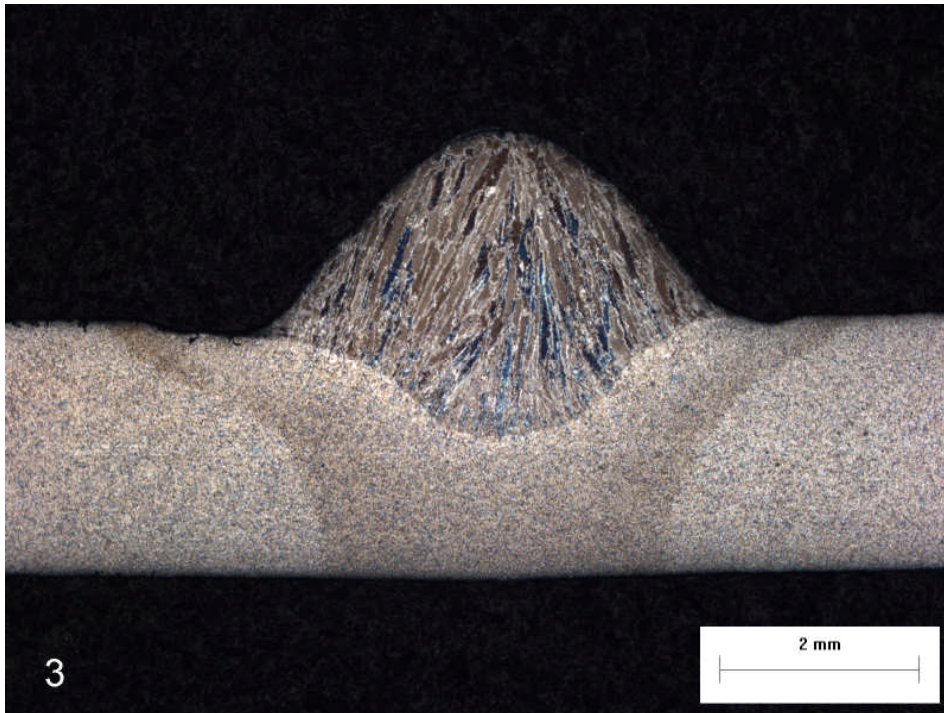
BOP Weld Made Using Single-Spot Laser at 3.3-kW and 2.5-m/min TS on 2.4-mm Sheet
